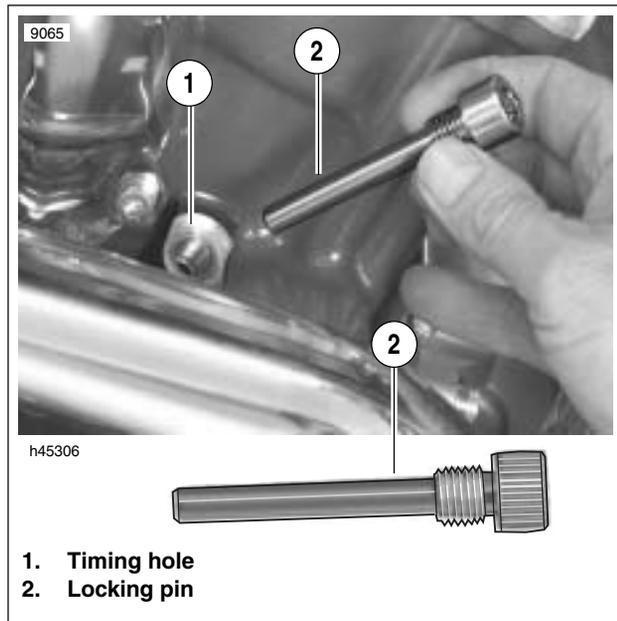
Top Dead Center Positioning Tool (HD-45653)
